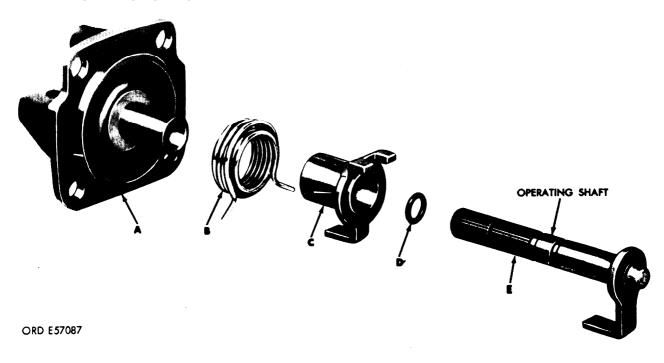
Disassembling operating shaft bearing and associated parts (all pumps except code A).
